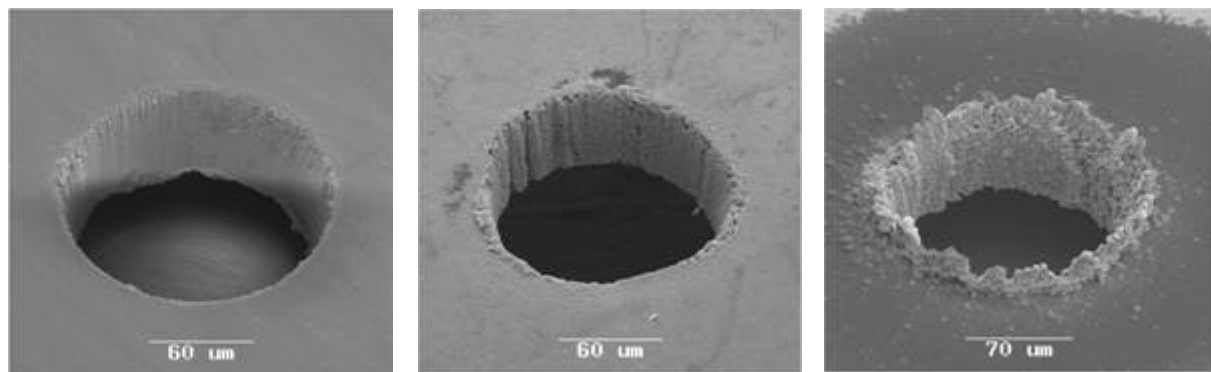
Hole drilling in $25\ \mu\text{m}$ steel foil with a STACCATO laser
